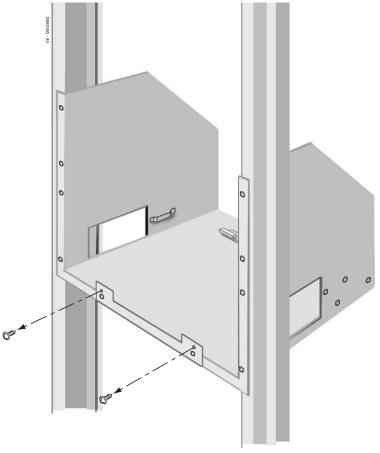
REMOVE THE SCREWS FROM THE RACK
